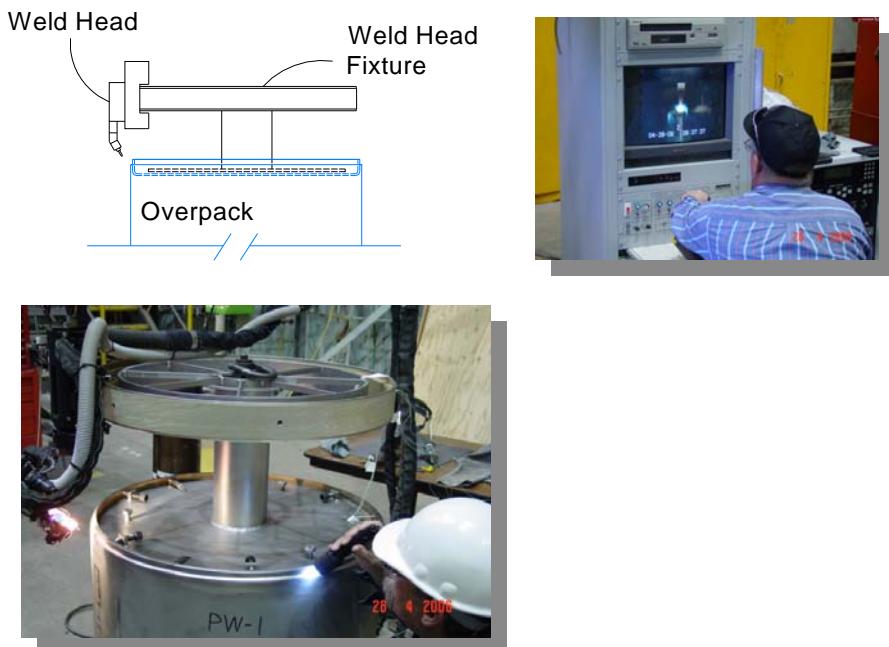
Weld head fixture and Welder Video Console.
